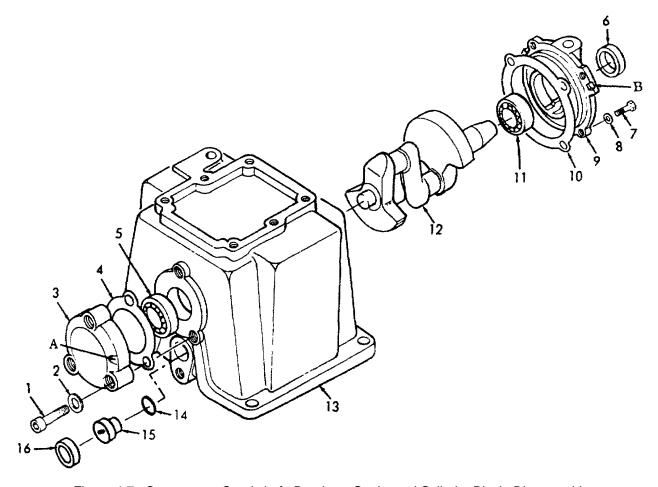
Compressor Crankshaft, Bearings, Seals, and Cylinder Block, Disassembly.
